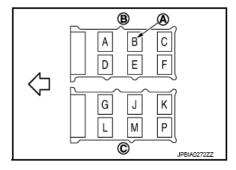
Identifying Camshaft Brackets Stamp Mark Courtesy of NISSAN NORTH AMERICA, INC.
